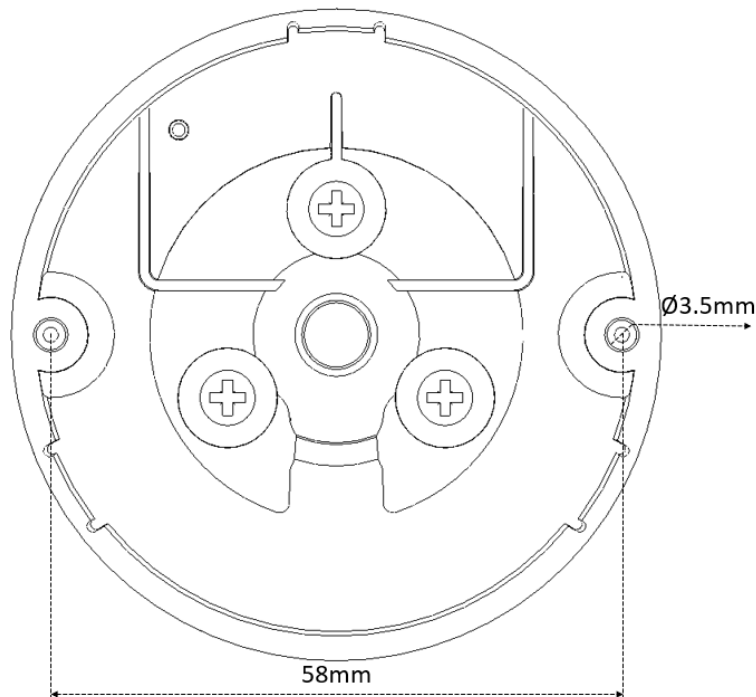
Modbus CO2 Multi-Sensor Dimension – Side View Flush Mount
